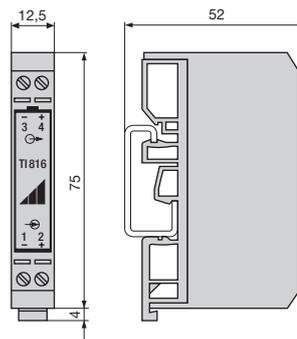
SINEAX TI 816 on G-type rail EN 50 035 – G 32.
